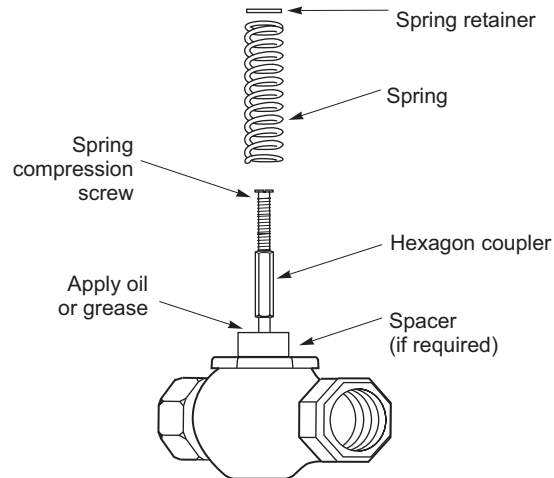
Assembly of AV-7800 Linkage Kit onto a Valve Body.
